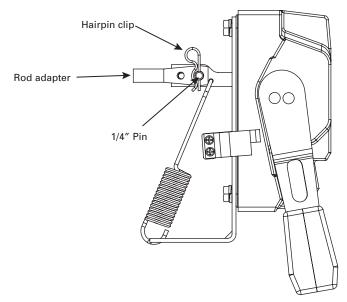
Install rod adapter using 1/4" pin and secure with hairpin clip.
